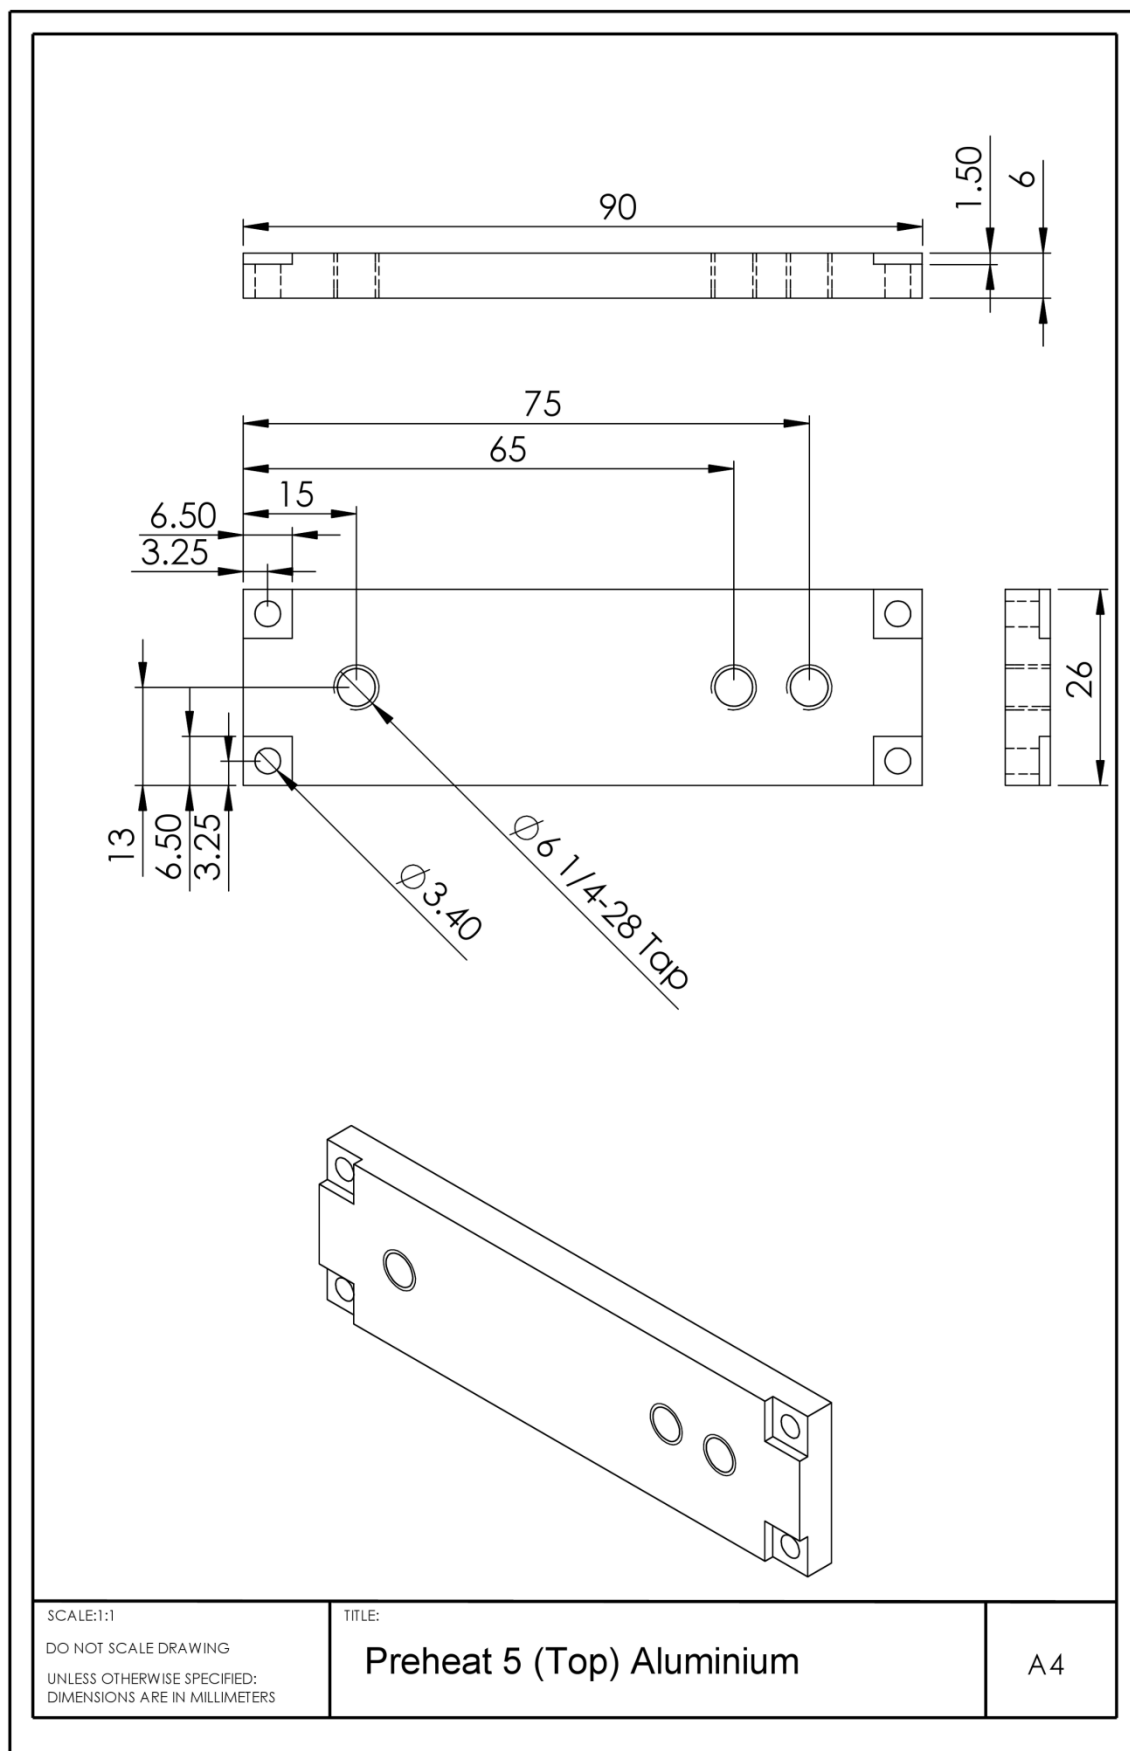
Technical drawing of layer 5 (top) of the preheat and bubble trap unit.
